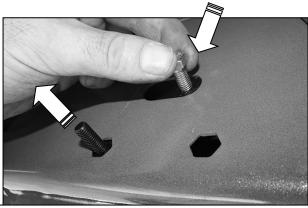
2009-mid 2015 Driver/Left front mounting location (No factory holes in pinch weld 2009-2011 models)
